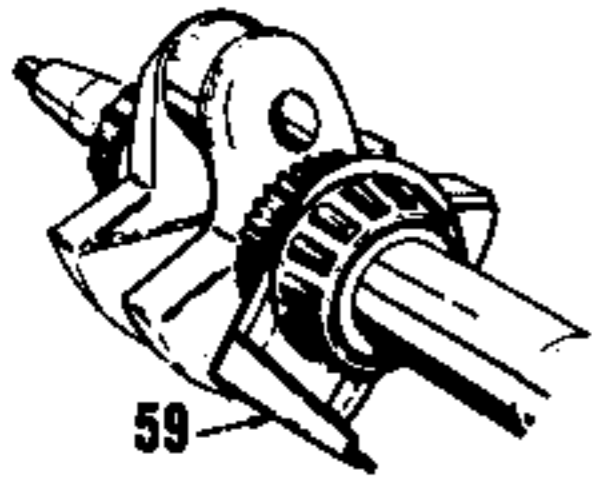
Oil slinger (59) on Models VH80 and VH100 must be installed on crankshaft as shown.
